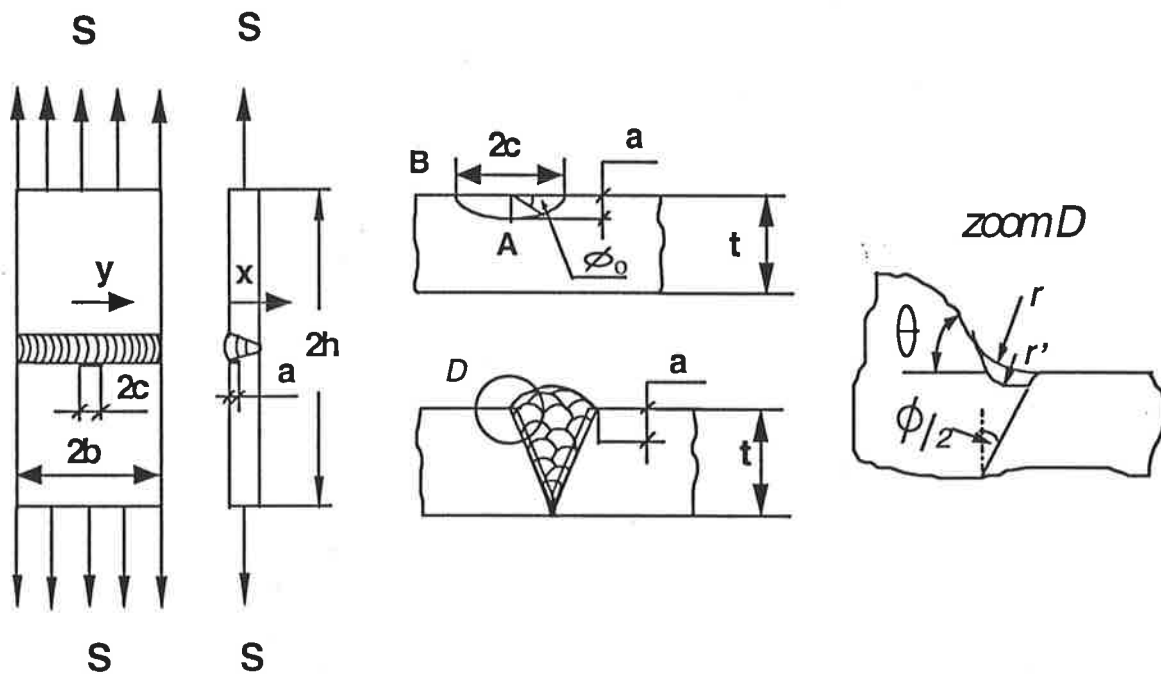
A semi-elliptical weld toe surface crack model in a butt welded joint
